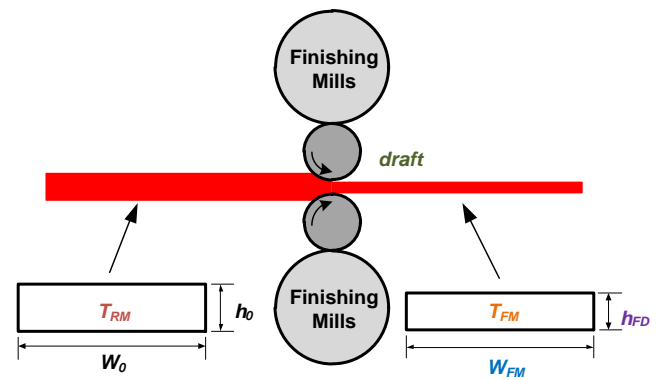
Cross-sectional shape of rolled strip during finishing rolling process
